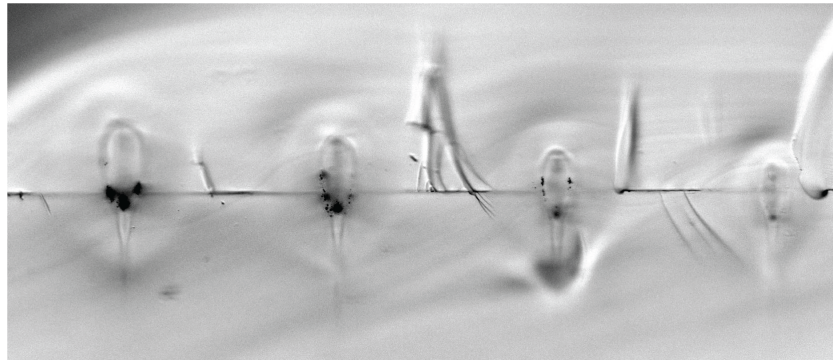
Side view of the welded borosilicate glasses after breaking through weld lines.
